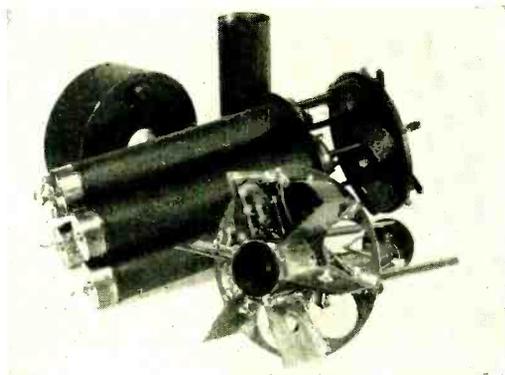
Dismounted view of the experimental u.h.f. receiver of F. W. Dunmore, National Bureau of Standards, showing method of assembly.
